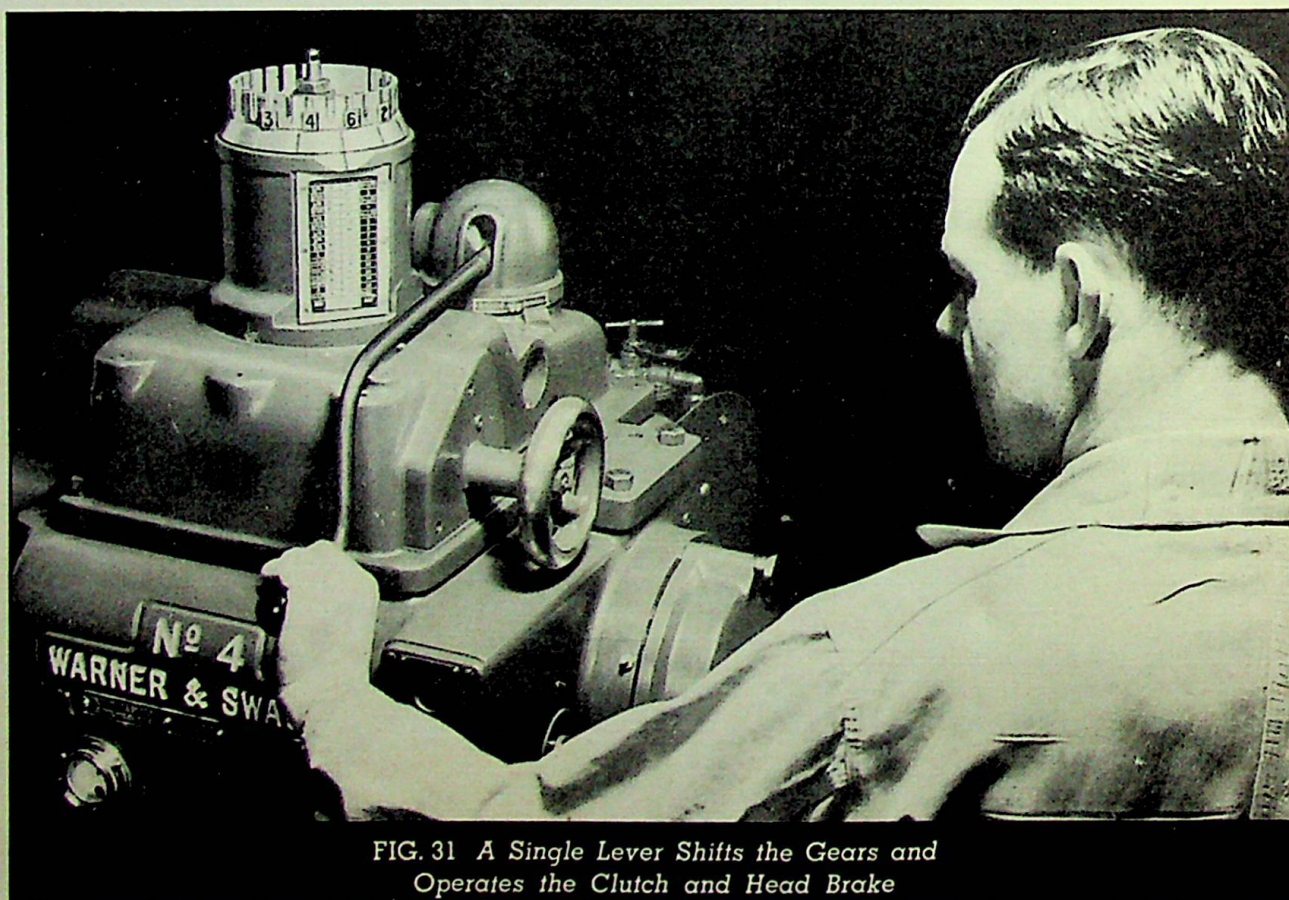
A Single Lever Shifts the Gears and Operates the Clutch and Head Brake
